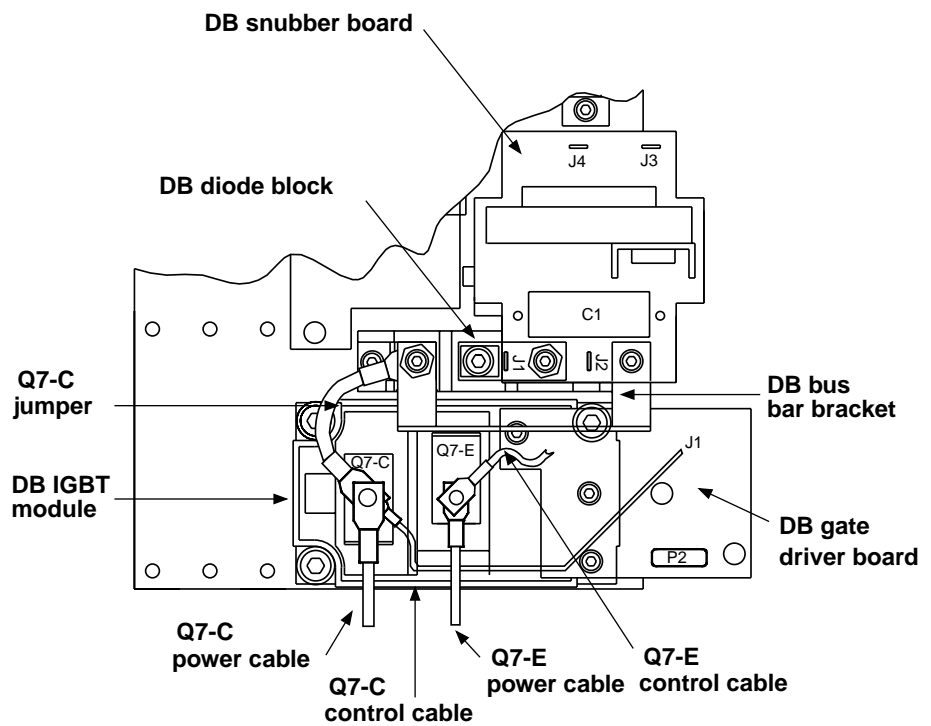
Dynamic Braking Snubber Board, Gate Driver Board, IGBT, Diode
